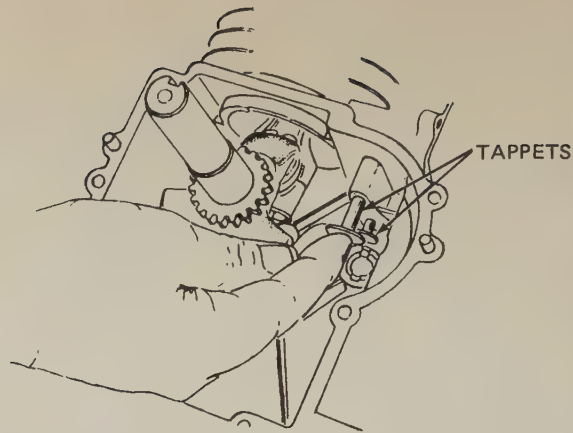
Installing valve tappets in the engine. (Clinton Engines Corporation)
